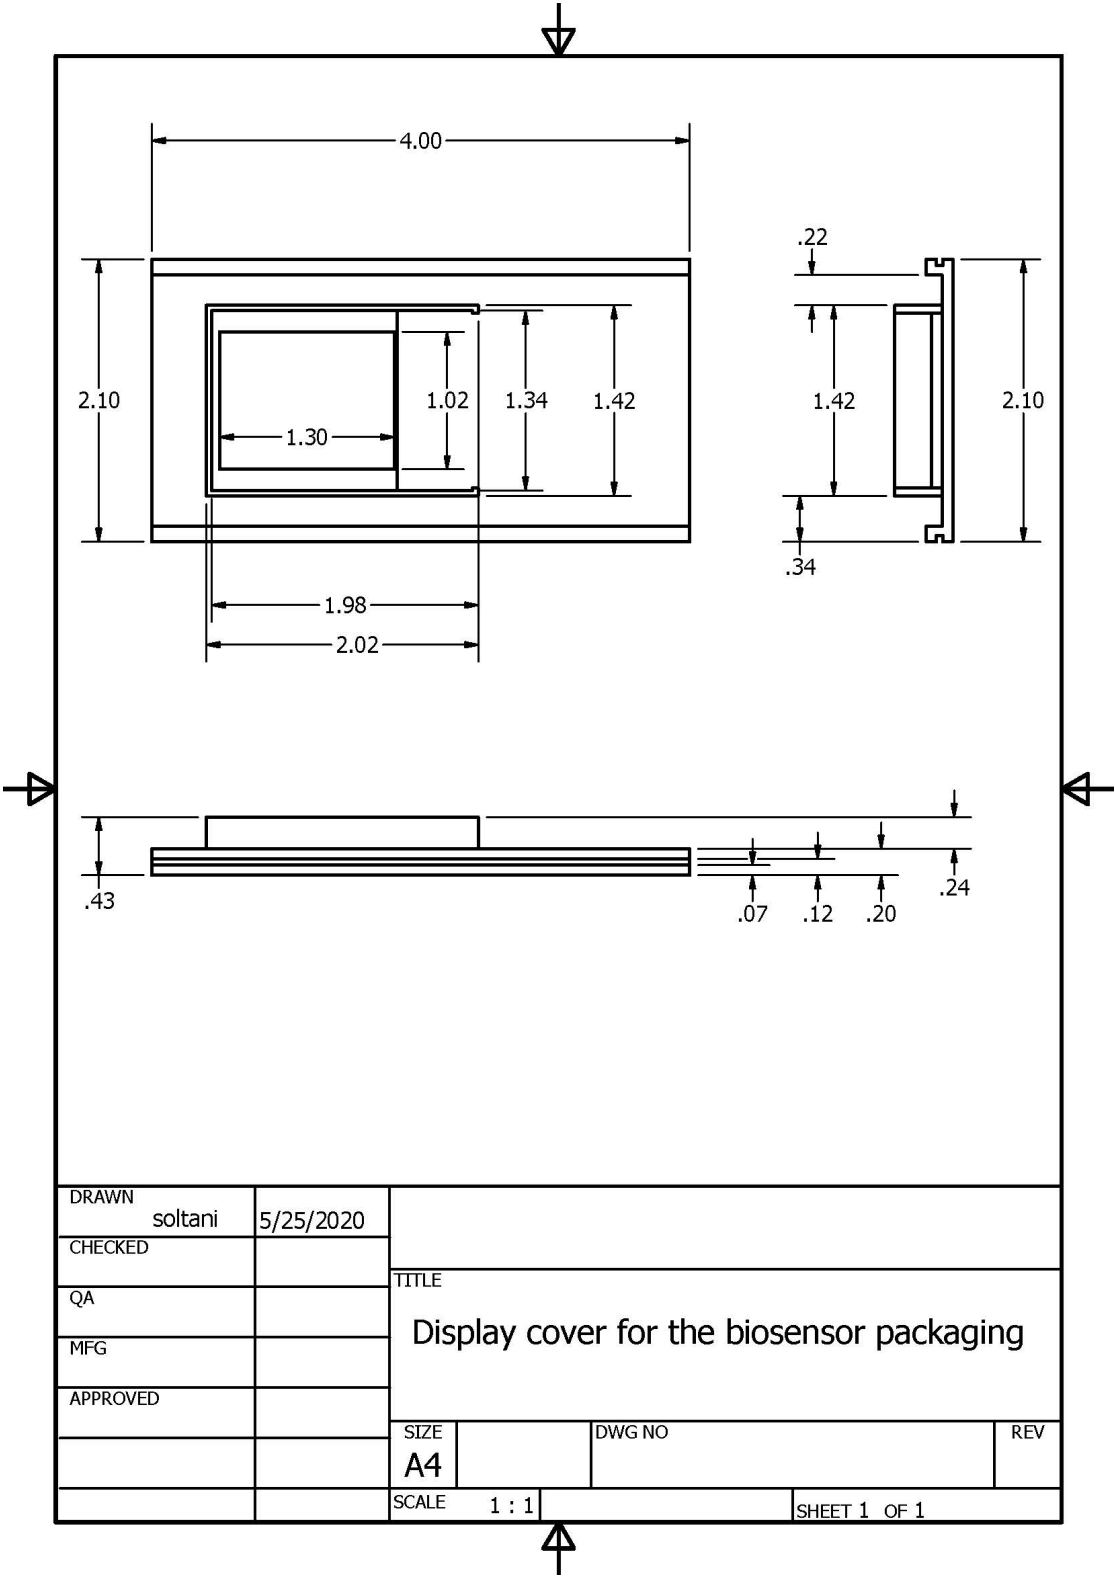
Technical drawing for the display cover, illustrated in Fig. 3.9.
